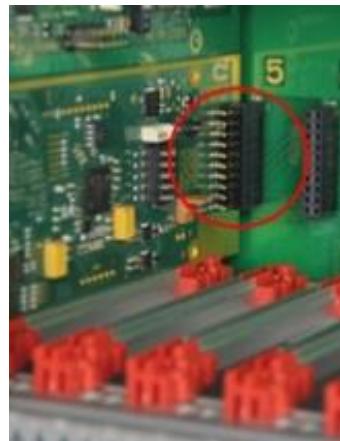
Option Card Mounted in a 21-Card Slide-In Chassis
